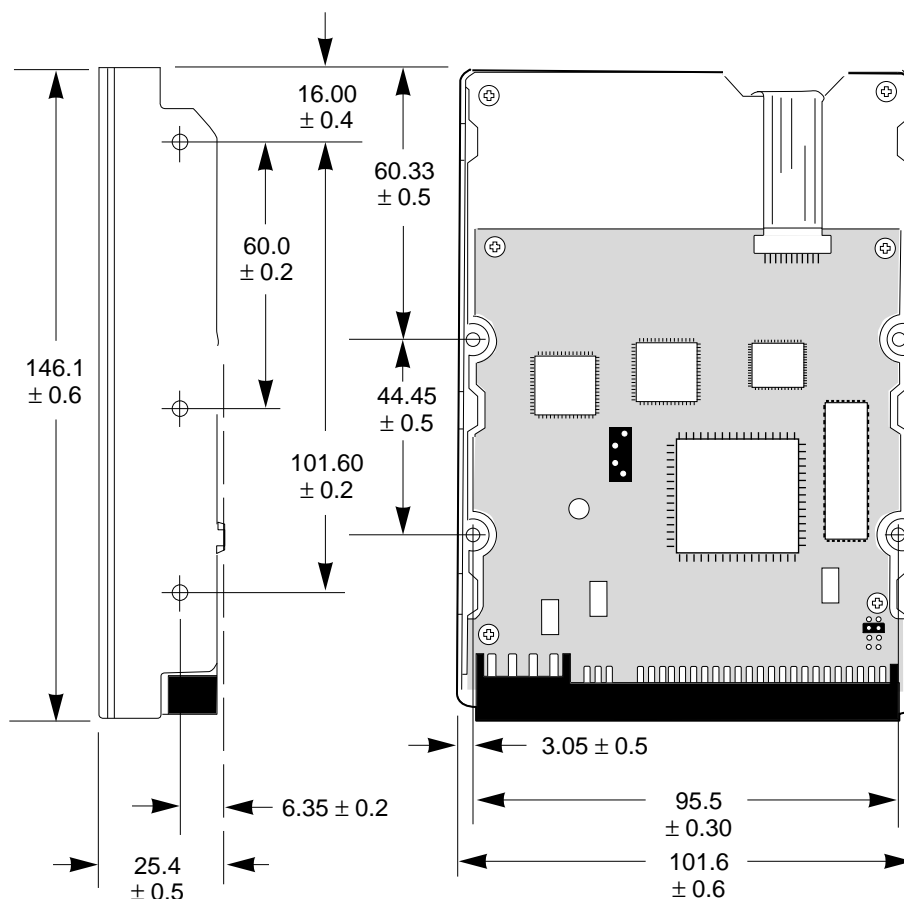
Mounting Dimensions for Quantum Fireball TM (One-Disk) Drive
